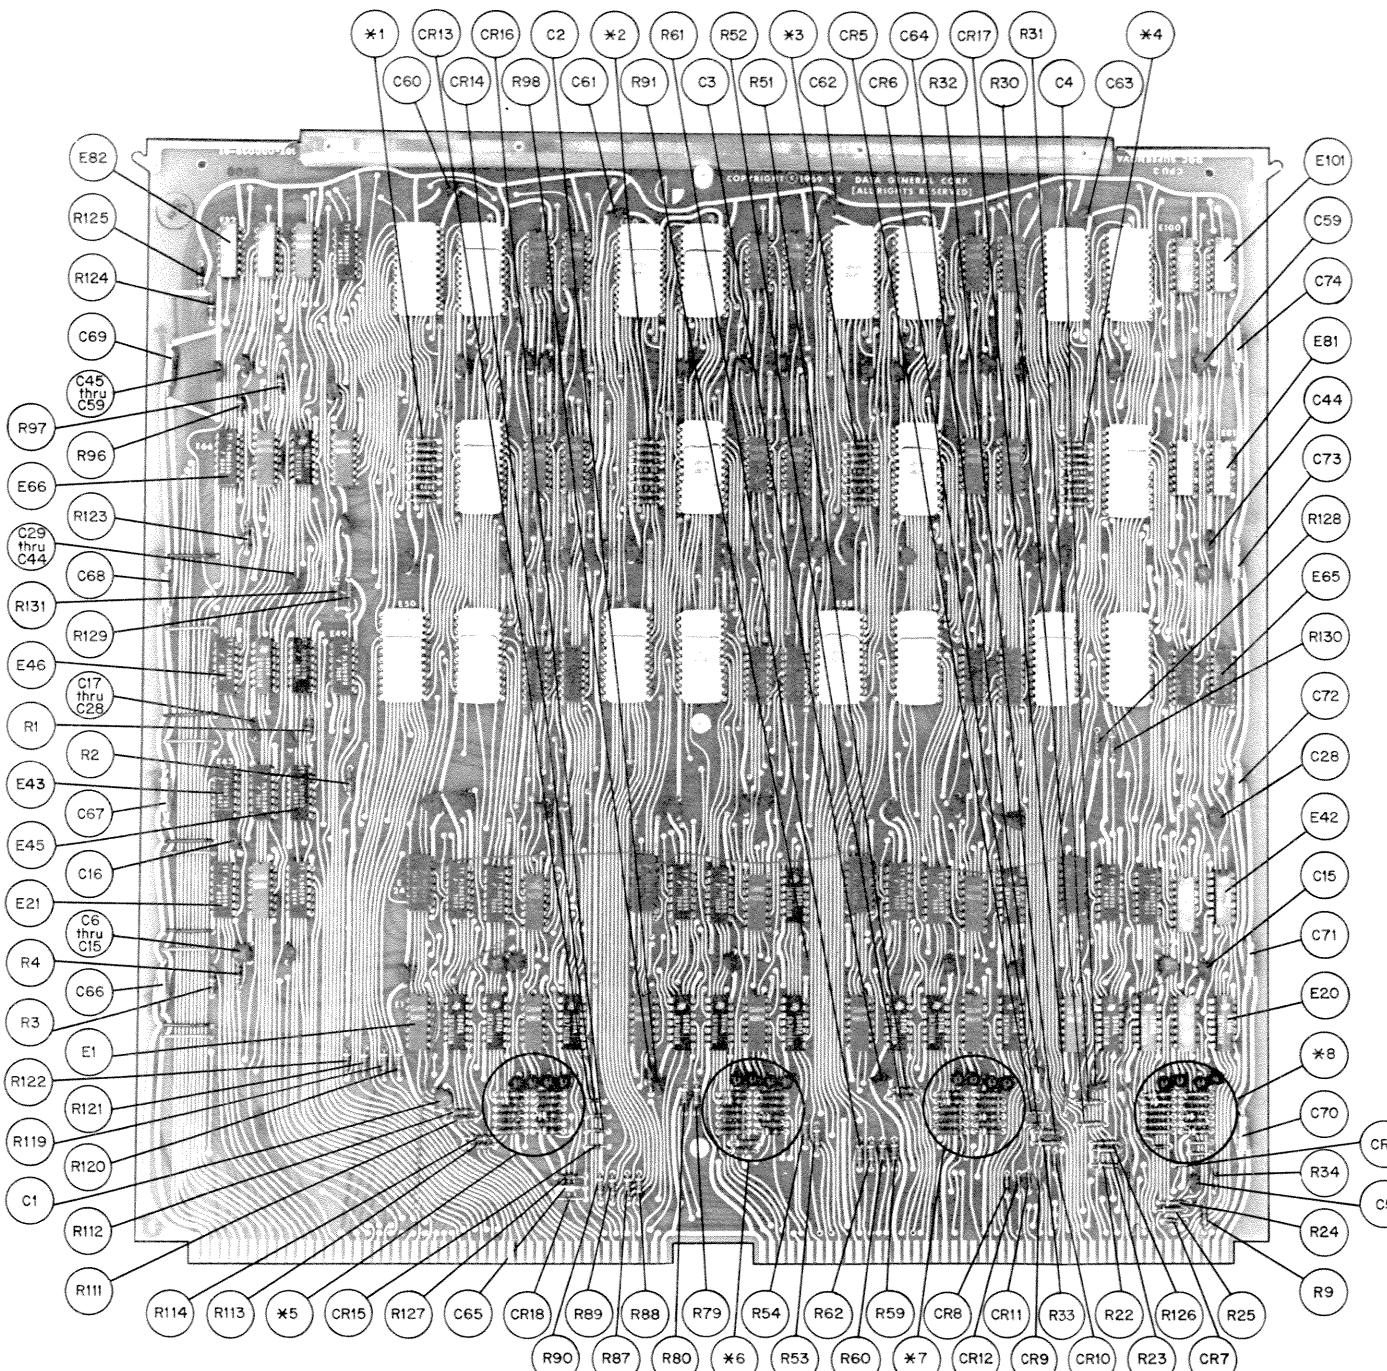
Central Processor-2 PCB Assembly (Sheet 1)
